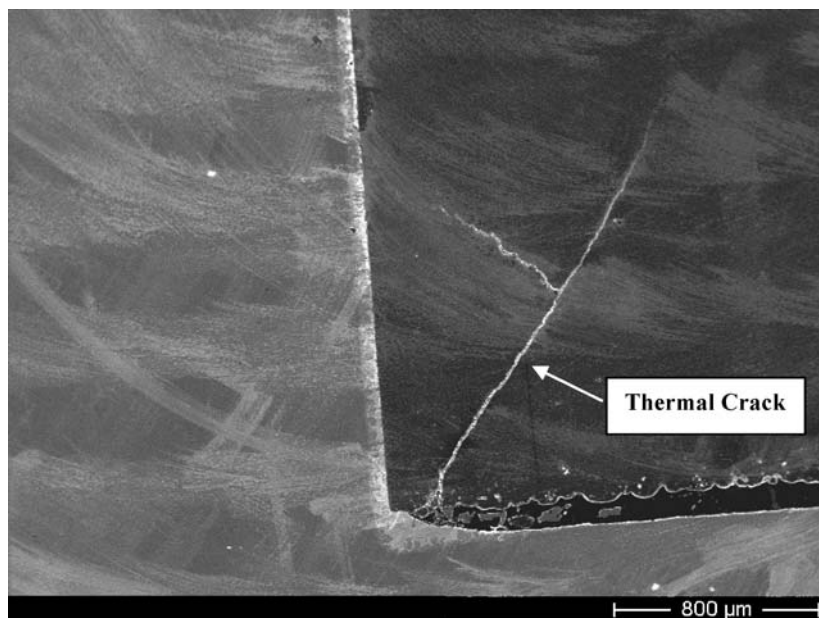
Thermal crack in Si_3N_4 /Stainless Steel joint brazed at 1025°C using Au-Ni.
